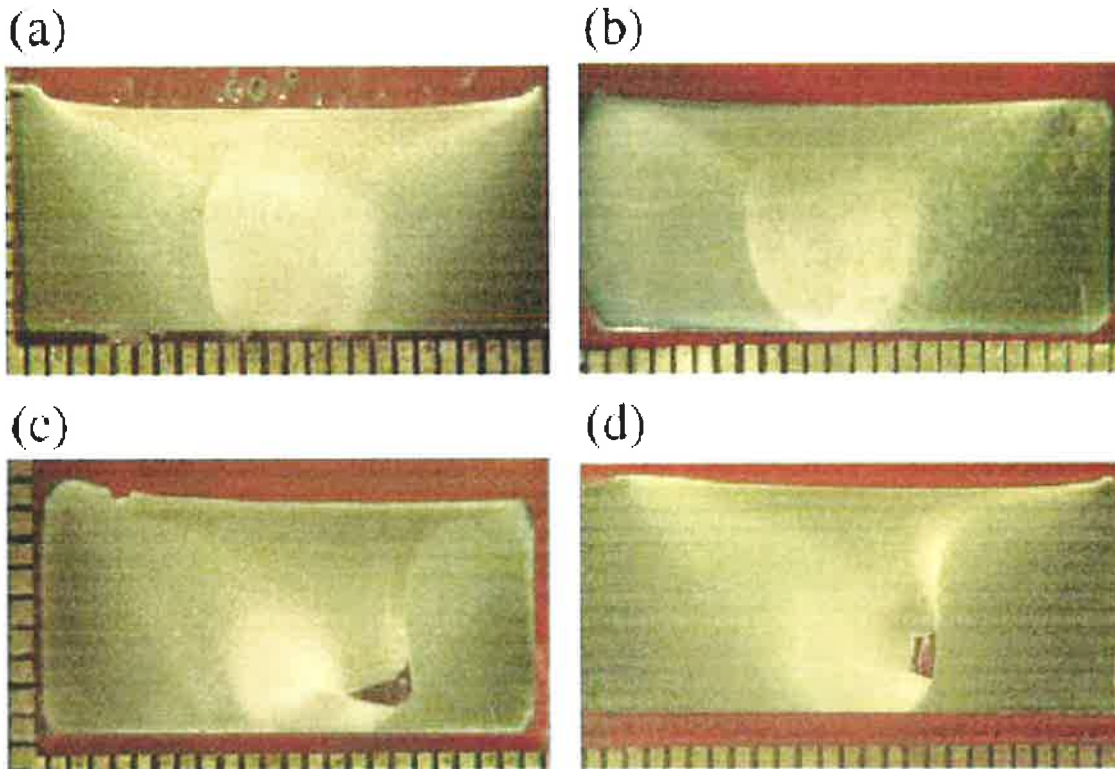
Macrographs transverse to the weld direction [116] of welds made using the tools shown in Figure 29.
